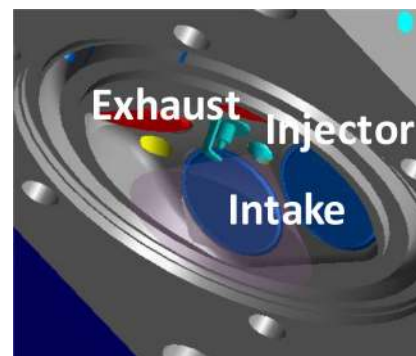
Base engine Combustion Chamber Shape: Pent-Roof Style 4 Valve Head.
